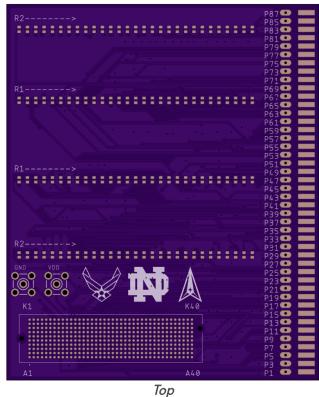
Render of Fabricated FMC to Card Edge Connector Board - Top
